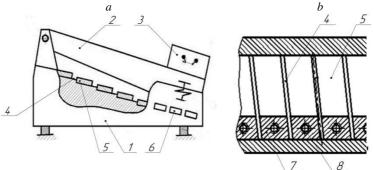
Crusher with discharge gaps: a - general view, b - working surface of the lower jaw, 1 - lower jaw; 2 - upper jaw; 3 - vibration exciter; 4 - gaps;
